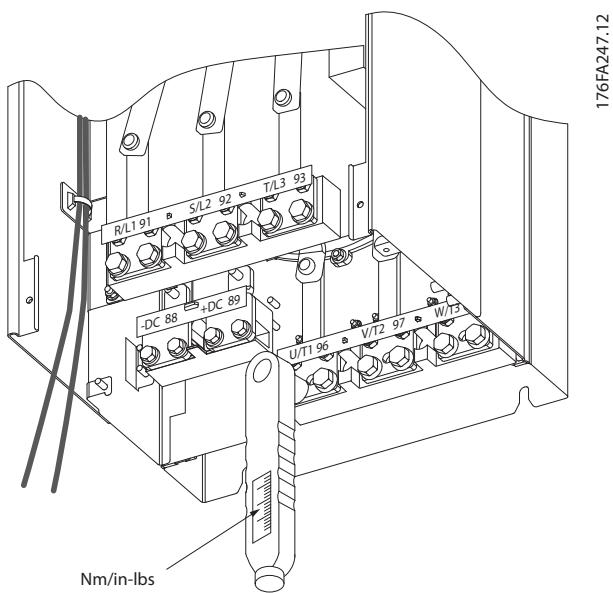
Use a Torque Wrench to Tighten the Bolts
